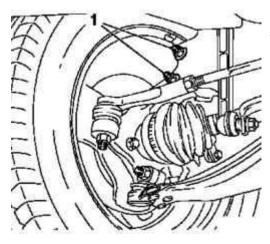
Bolts supporting pipes spring stands at a turning fist: 1 - Bolts
